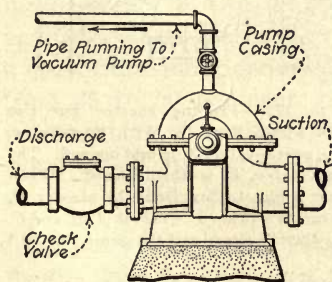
Centrifugal Pump Arranged For Priming By Means Of A Vacuum Pump.
